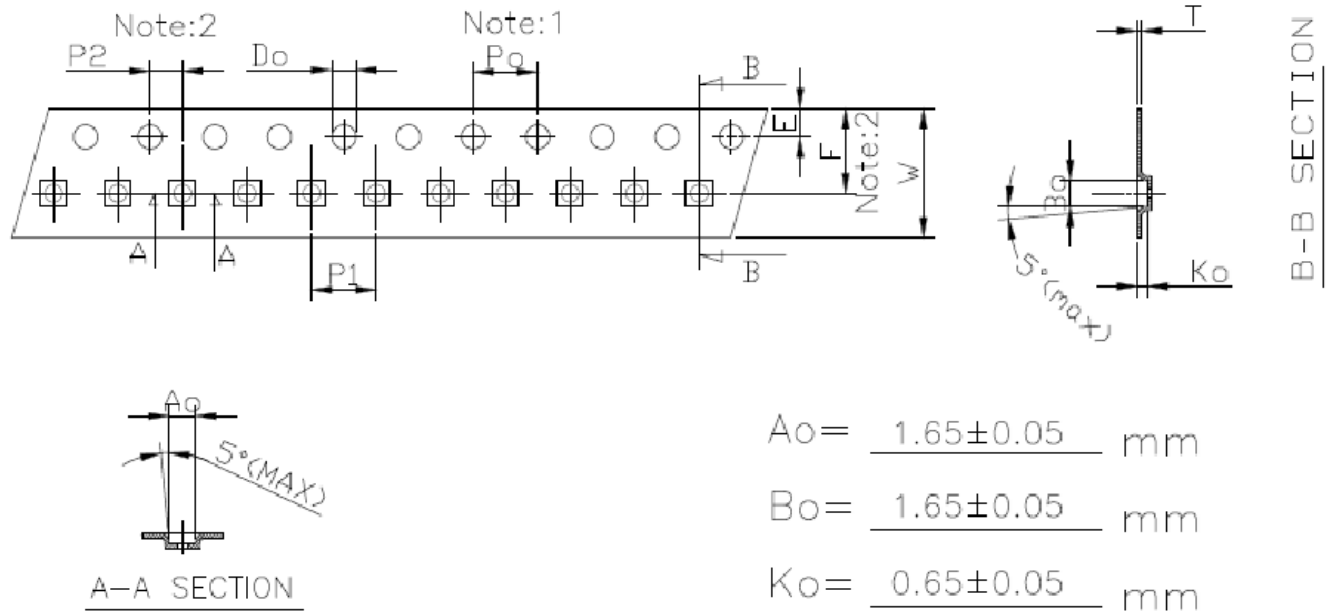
Tape and Pocket Drawing for LGA-4 Package
